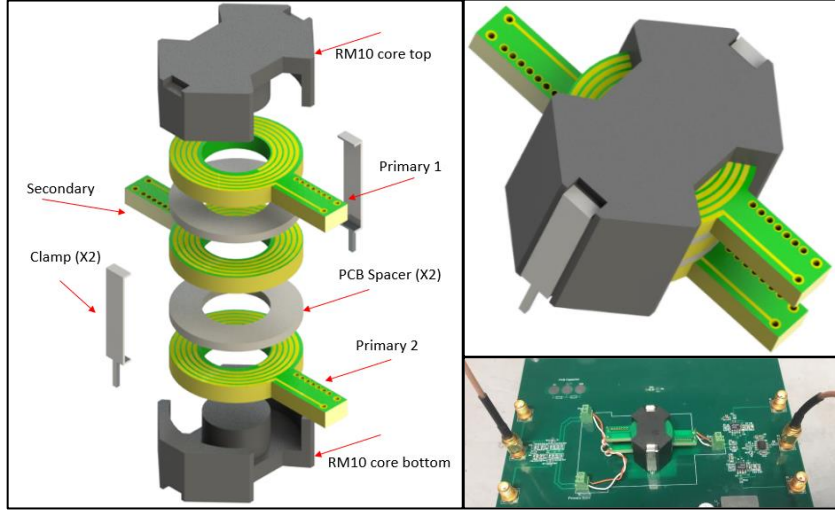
Left*: Exploded CAD view of the ferrite core, transformer windings, spacers, and clamps. The secondary winding is sandwiched between the two primary windings. The stack-up consists of identical 3.1 mm-thick primary and secondary winding PCBs separated by 1.5 mm spacers that are made from the same PCB material, and potted and clamped around the N48 ferrite core. *Right top*: perspective view of CAD of assembled transformer. *Right bottom*: Photograph of transformer on RCB board.
